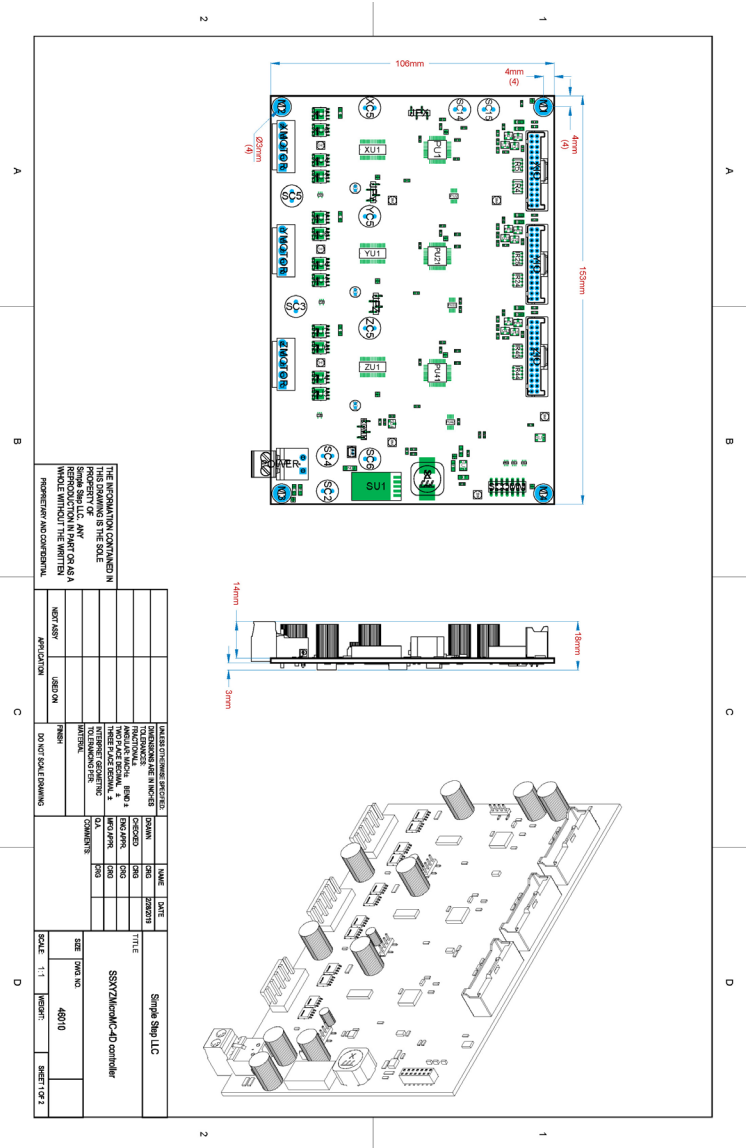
SSXYZMicroMC Board Mounting Hole Outline
